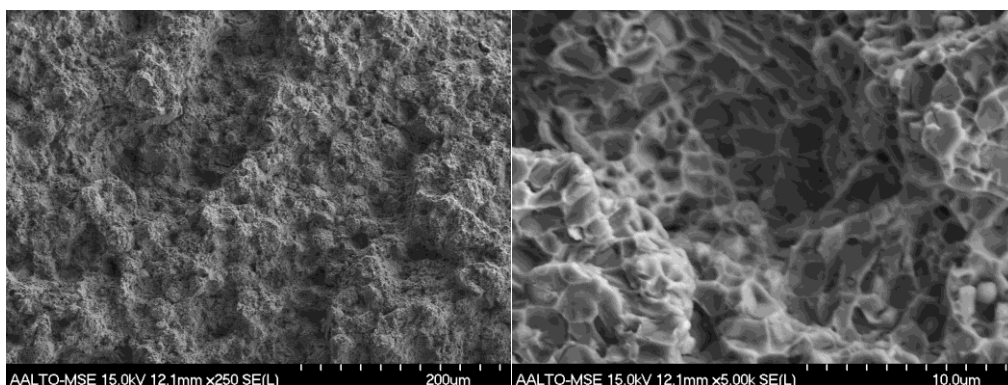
SEM images showing the fracture surface of a Hadfield steel test sample.
